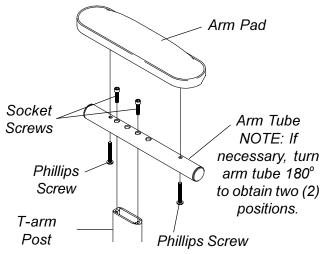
ADJUSTING THE T-ARMS - DEPTH
